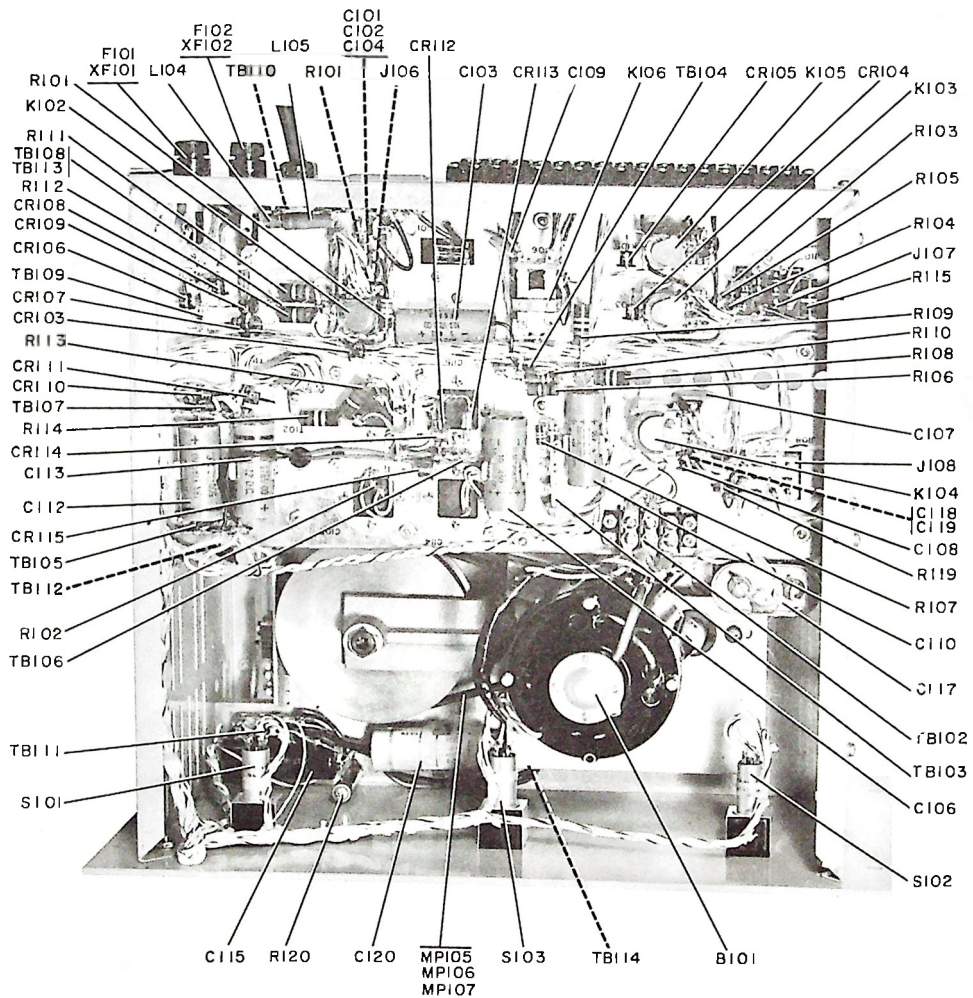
642A-2 Recorder/Playback Unit, Parts Identification (Bottom View)
